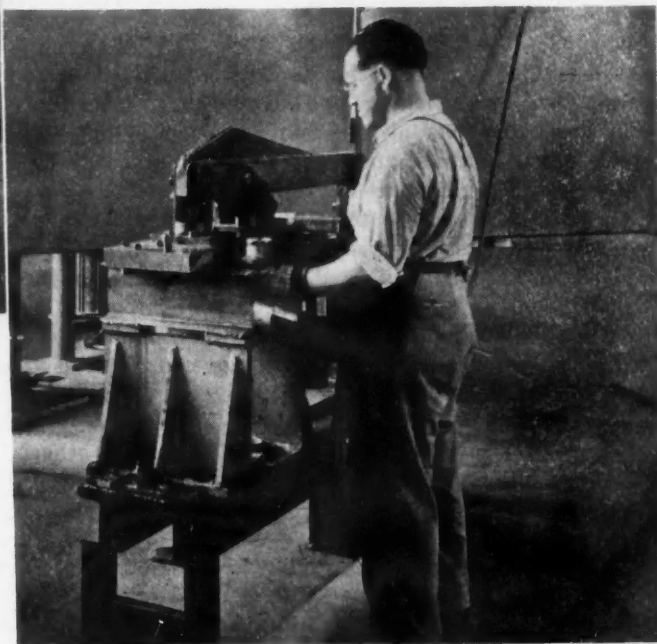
(Right) This device, resembling an alligator-type riveter, was designed to flatten the bolting flanges at a single squeeze. It can apply up to 30,000 pounds pressure between its jaws.
